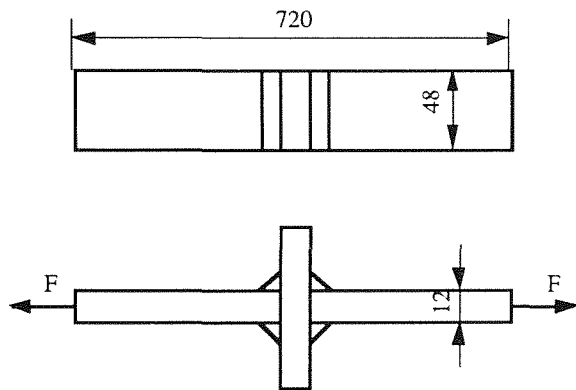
Schematic drawing of the cruciform welded joint (6061-T651), ref.[3]
